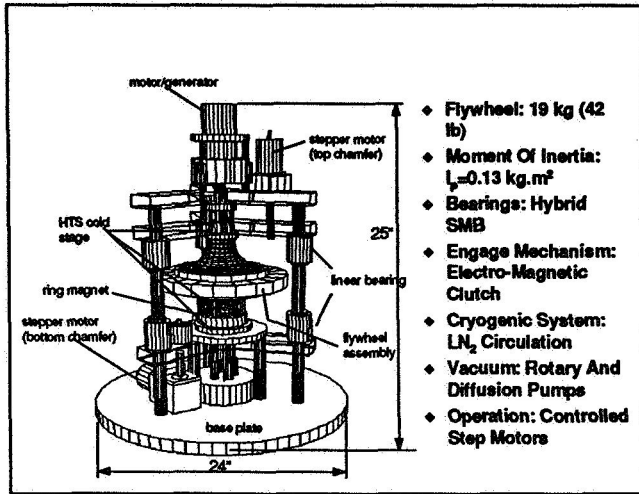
Three dimensional drawing of our prototype kinetic energy storage system as assembled.
